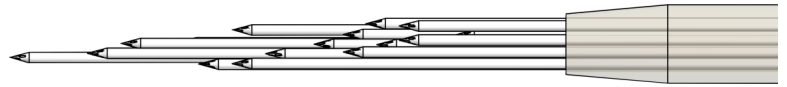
Side view on microdrive guide tube loaded with 16 heptodes in a concentric arrangement
